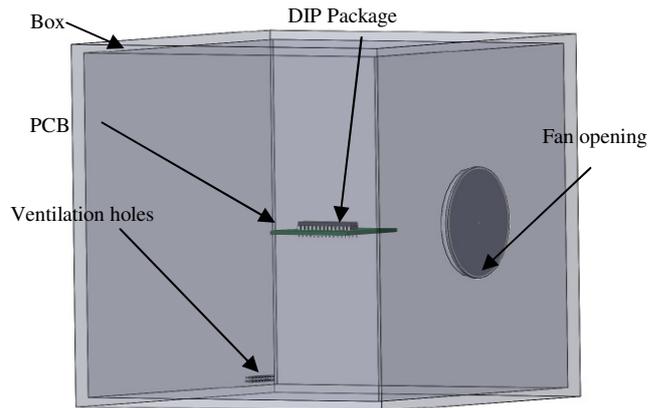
SolidWorks model for DIP-28 package mounted on PCB
